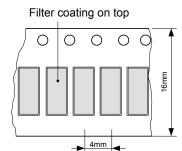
Tape Dimensions. Parts are placed with filter coating top side
